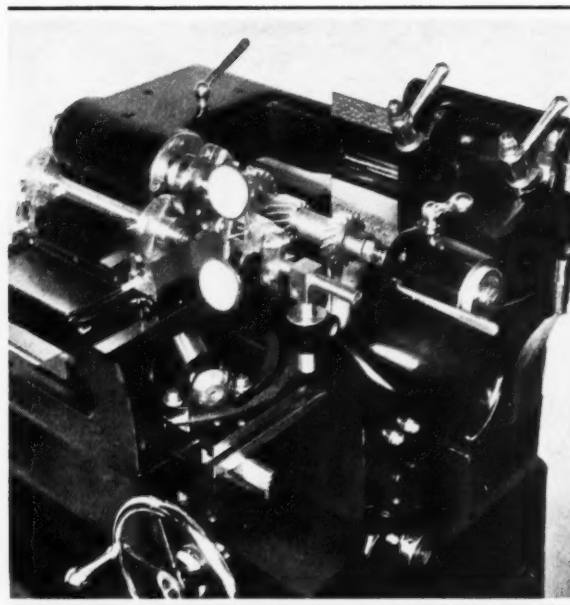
Machine Designed for Checking the Lead of Spiral Gears up to 16 Inches in Diameter
